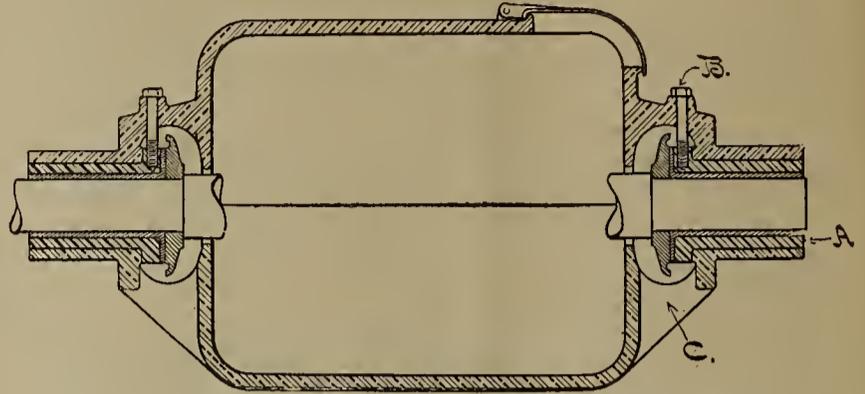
SECTIONAL VIEW OF MOTOR CASING AND BEARINGS.
